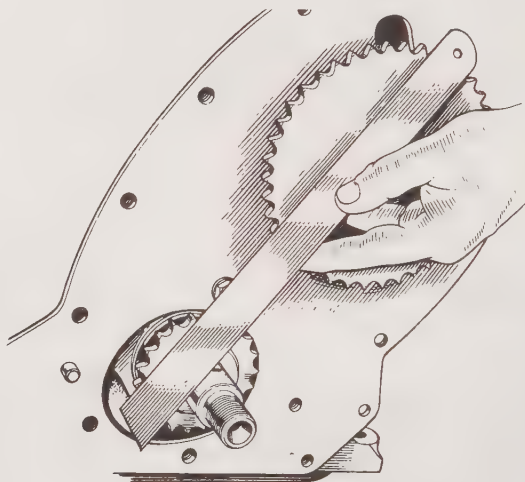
39 Checking sprocket alignment by means of straight-edge.
